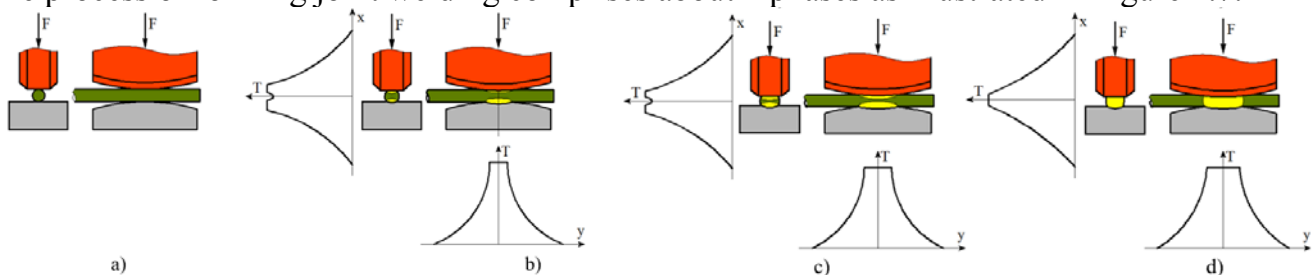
Diagram of Principals of resistance seam welding for reinstatement of shaft with steel filler wire
